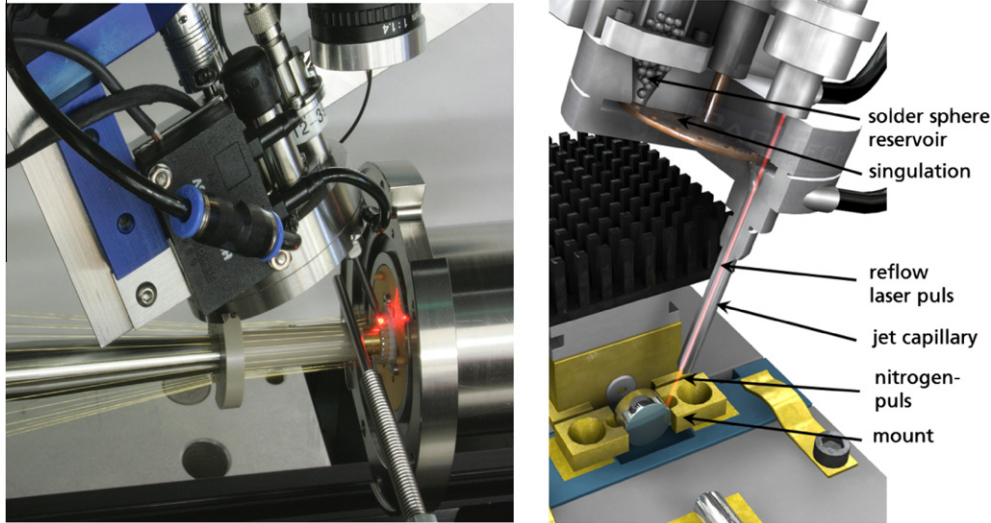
Left: soldering of strained gold wire electrodes on connecting flange by Solderjet Bumping by means of the rotating assembly device. Right: operation principle of Solderjet Bumping at assembling of an optical system.
